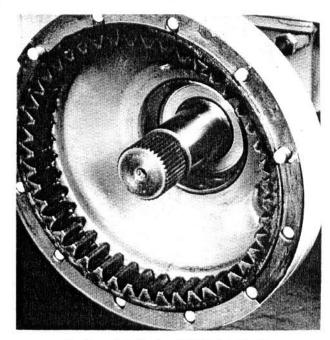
Axle Shaft and Oil Seal in Position (Narrow Ring Gear)
